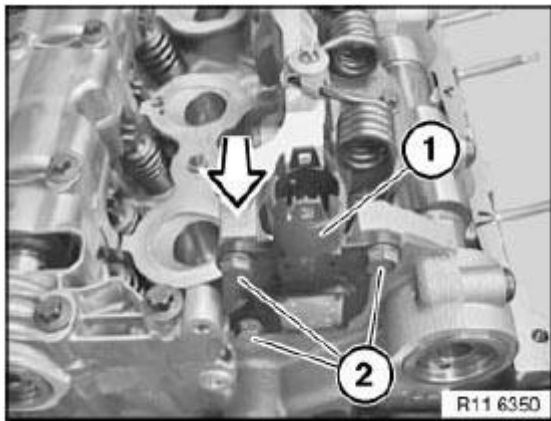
Identifying Eccentric Shaft Sensor And Bolts
